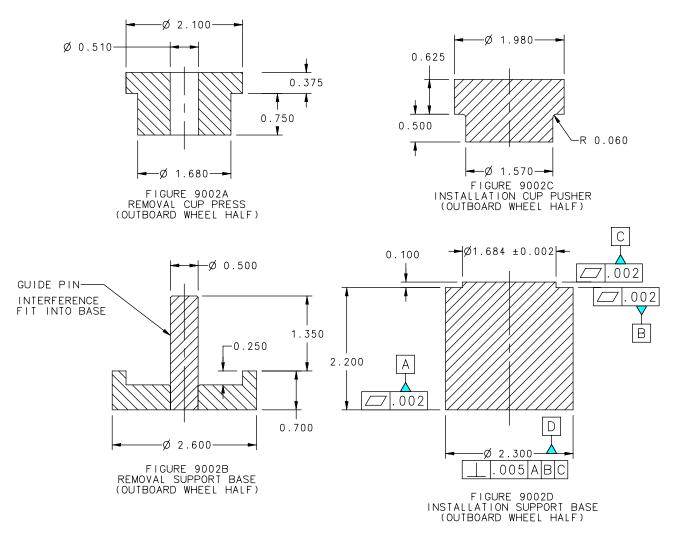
Outboard Wheel Half Bearing Cup Tools
